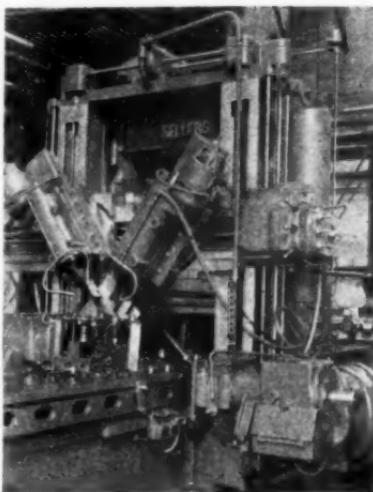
A standard planer with two special units. The heads on the cross rail are so arranged that the tool cuts both on the forward and return strokes. This machine was built to cut slots in the rotors of electric motors and generators.
